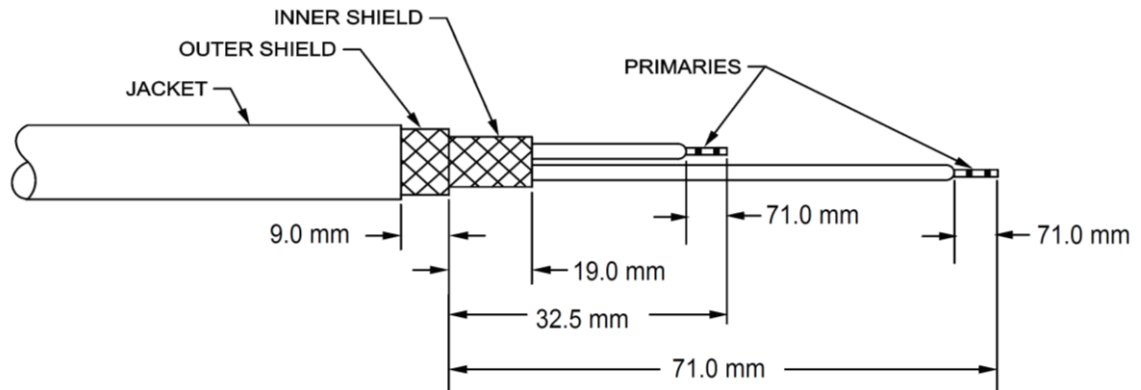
Double Shield Cable Strip Dimensions for Mini-Seal Crimp
